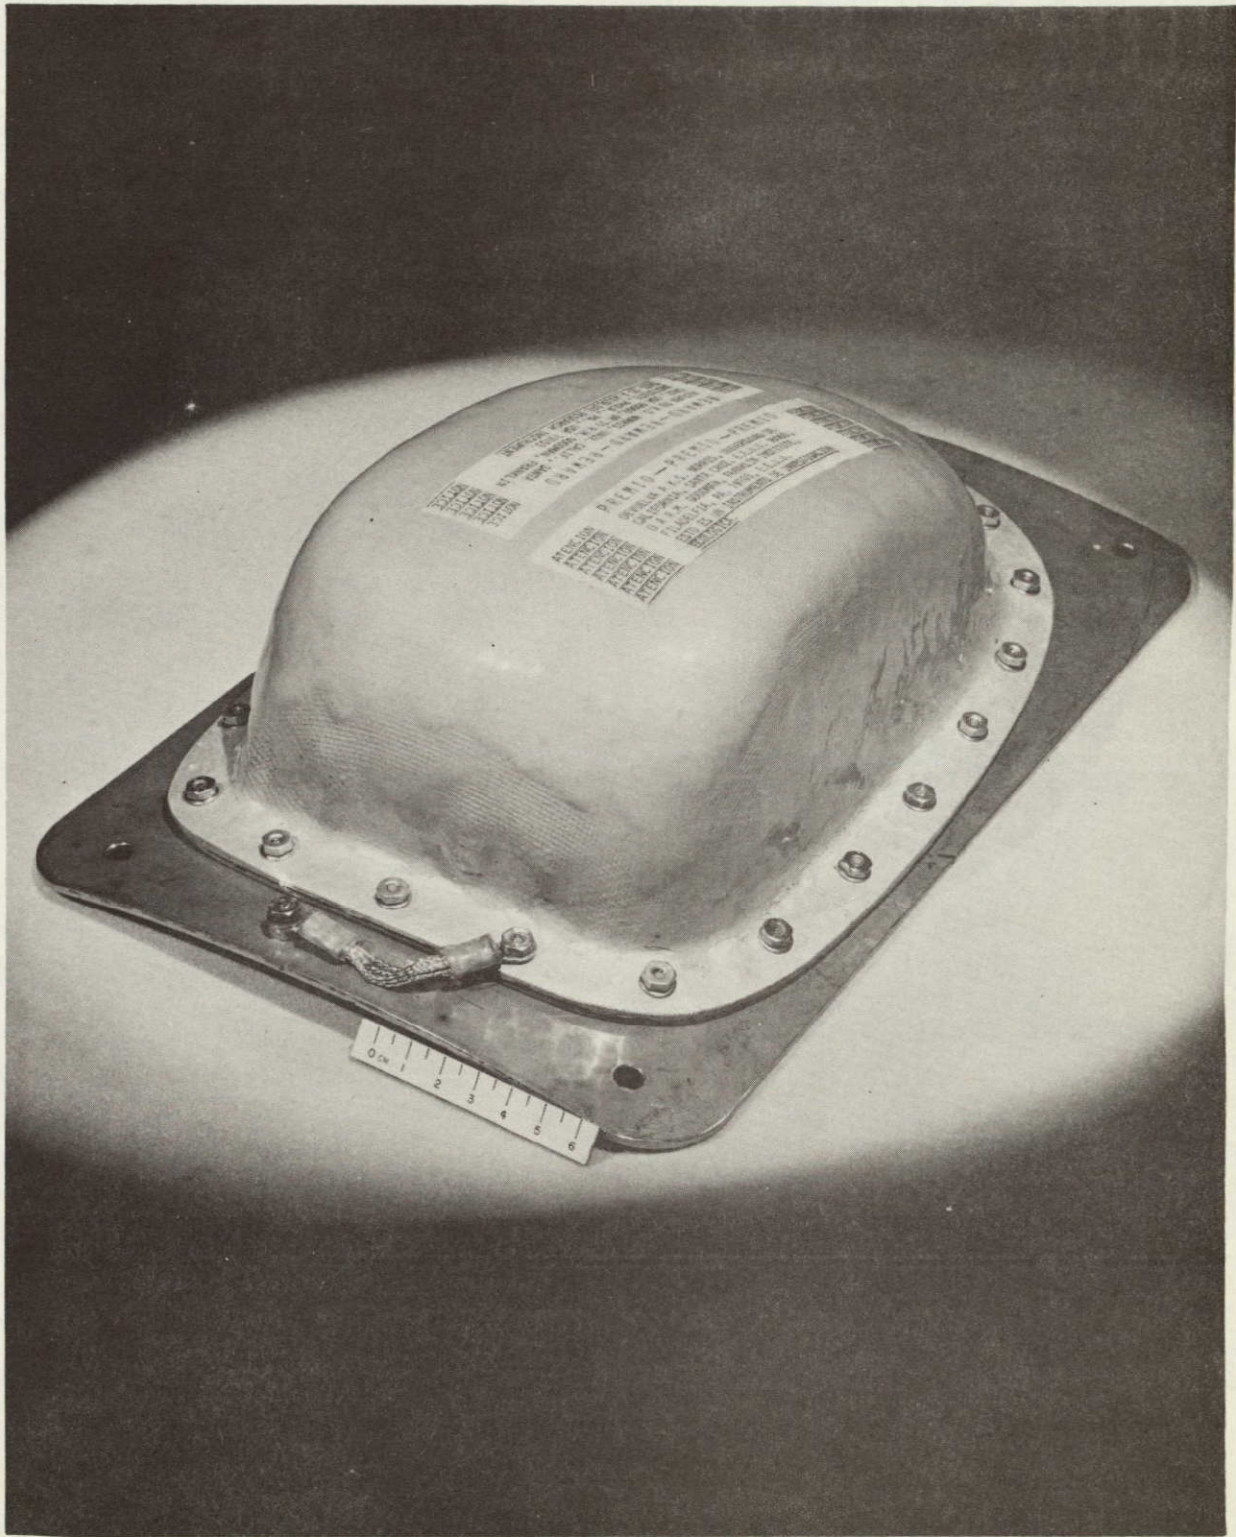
Pod Assembled to Baseplate—Leading Edge
